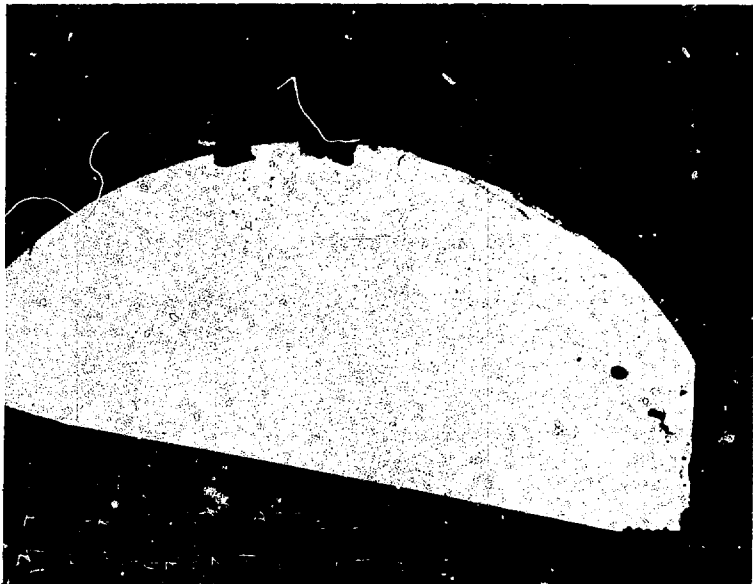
Moore diamond tool #L-44. (a) Top view, 121X.
